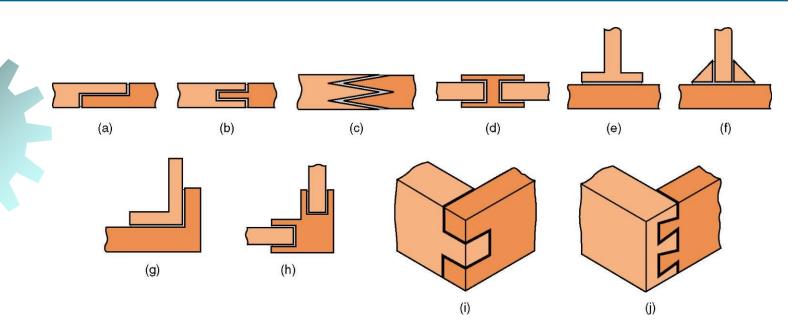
Some joint designs for adhesive bonding: (a) through (d) butt joints; (e) through (f) T-joints; (b) and (g) through (j) corner joints.
